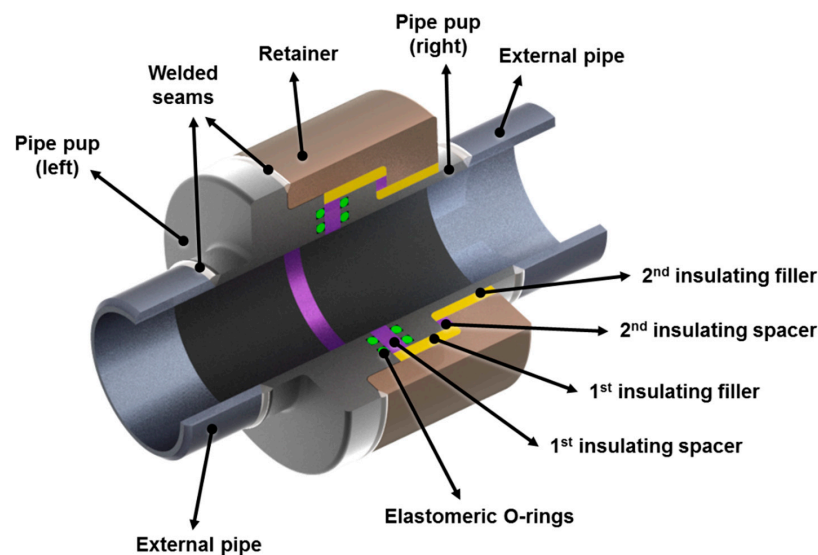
Example of insulating joint with a double-O-ring sealing system.
